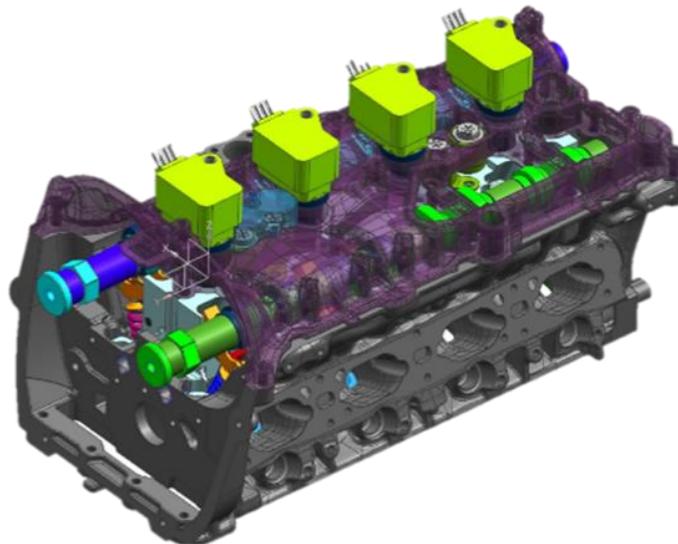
Development DSF cylinder head with project specific hardware installed (modified casting, Deactivation Roller Finger Followers, Deactivation Control Valves, intake and exhaust camshafts and machined cam cover)
